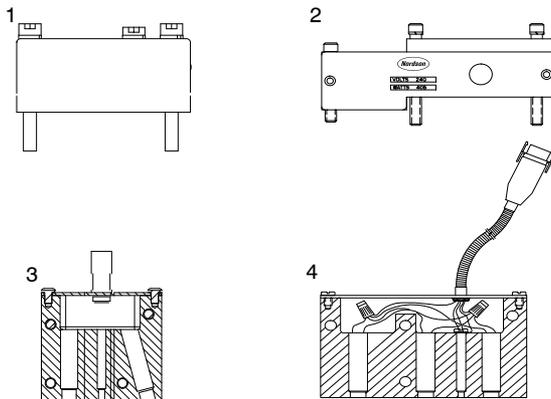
Socket Screws for Bracket Mounting with Adapter Block and Regulator Heaters
